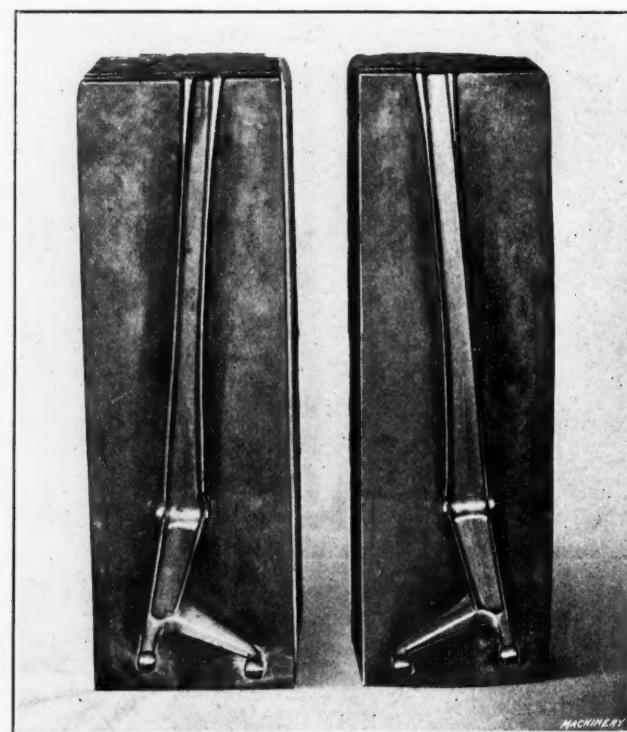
Upper and Lower Dies used in Steam Hammer shown in Fig. 63 for finish-forming the Ford Front Axle
